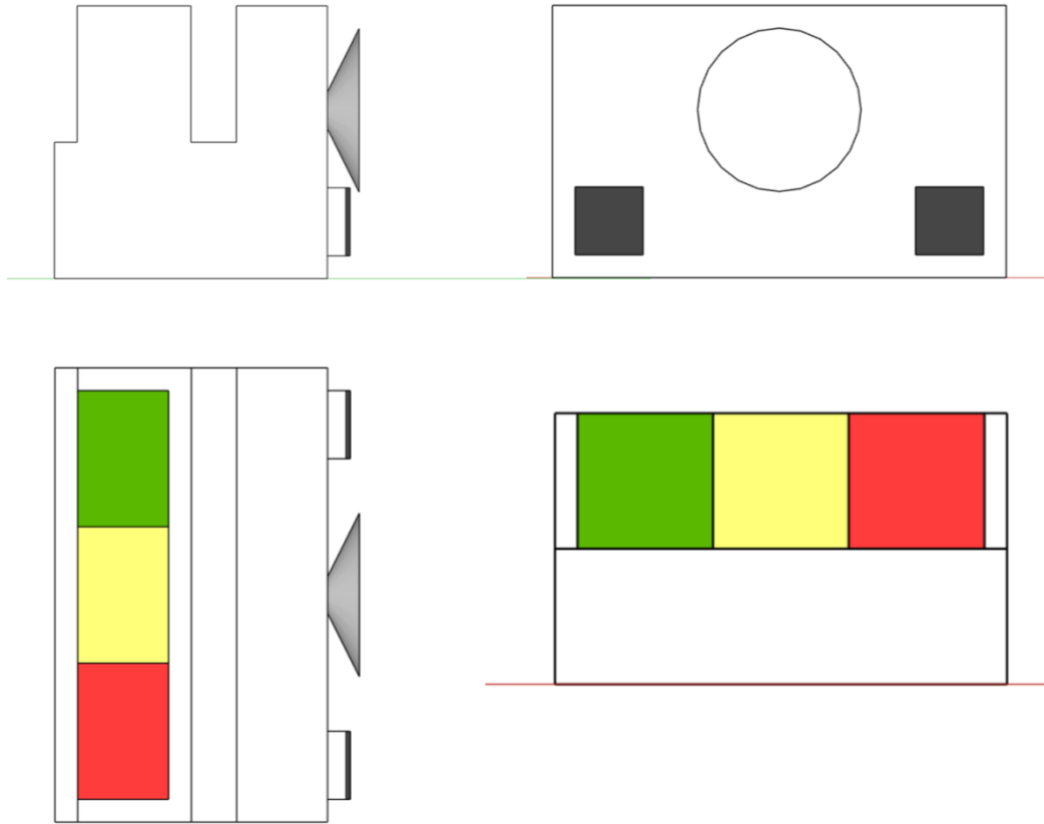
CAD model of the first iteration of the support object. Clockwise from the top left corner: side view; back view; front view; top view.
